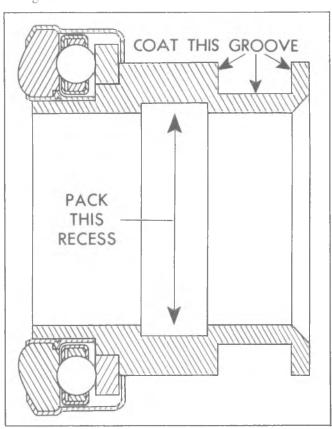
C-13--Lubrication Points on Clutch Throwout Bearing
